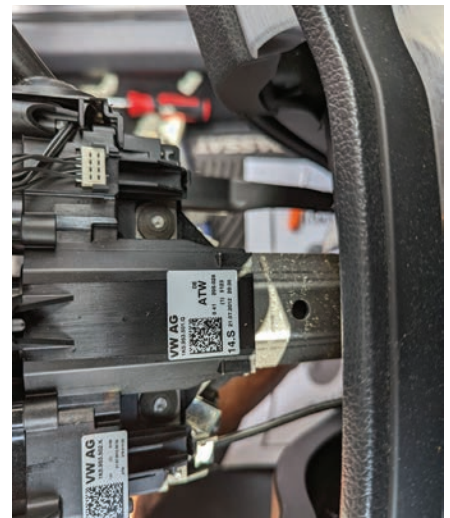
This view from above shows the two shear-headed bolts to be removed.
